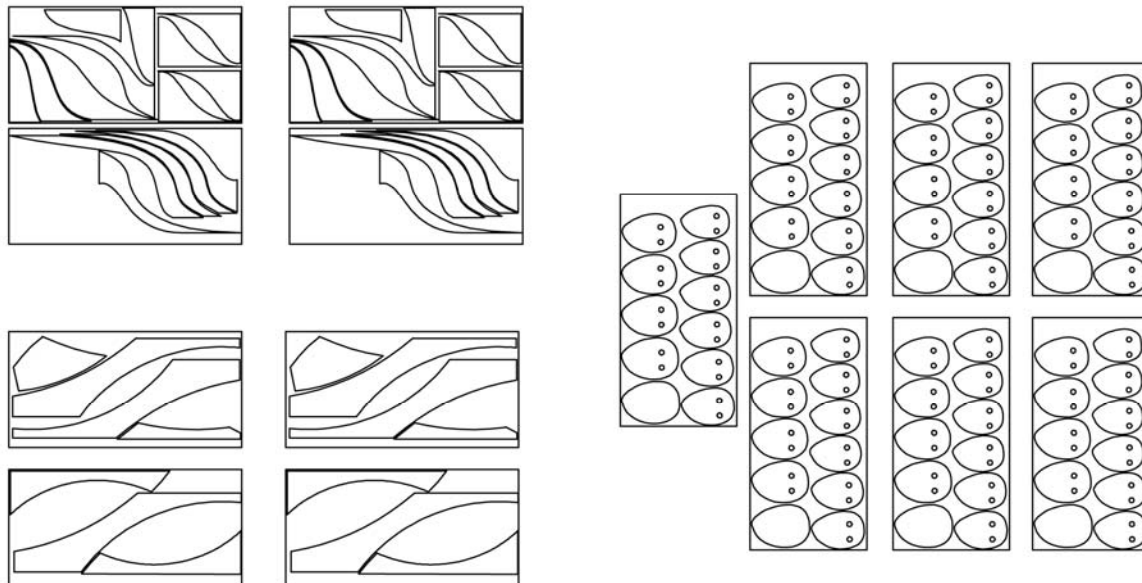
Example of 2-D CAD file cut-sheets for fabrication.
